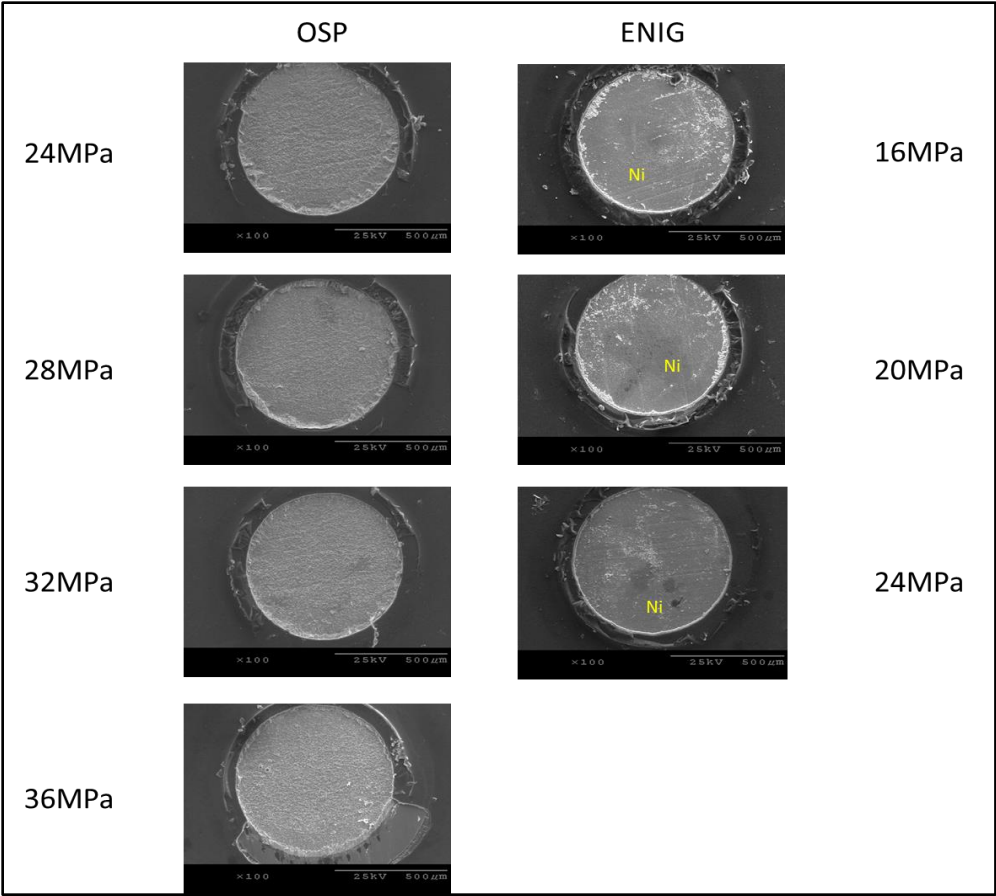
Fractured surface of Innolot with OSP and ENIG surface finish
